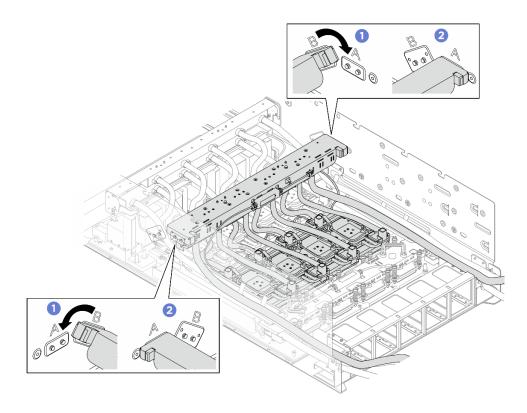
Repositioning the rear H100/H200 GPU cold plate module manifold
